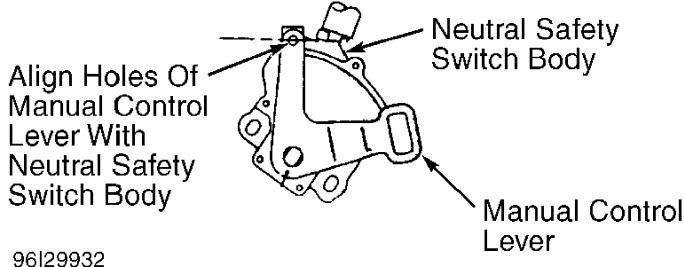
Adjusting Park Neutral Position (PNP) Switch Courtesy of Mitsubishi Motor Sales of America.
